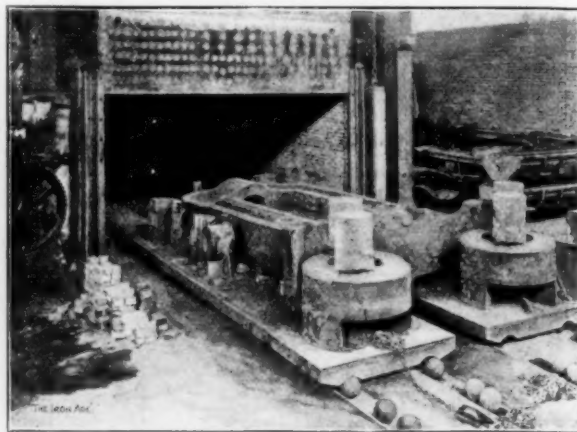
Annealing a 50,000-Pound Steel Casting.
